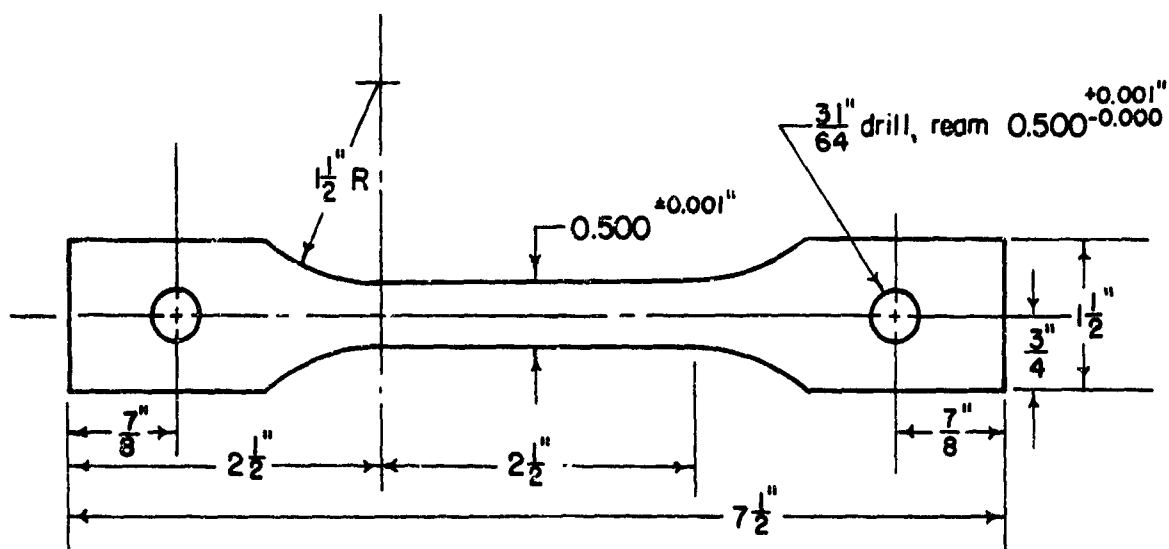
SHEET AND THIN-PLATE TENSILE SPECIMEN
